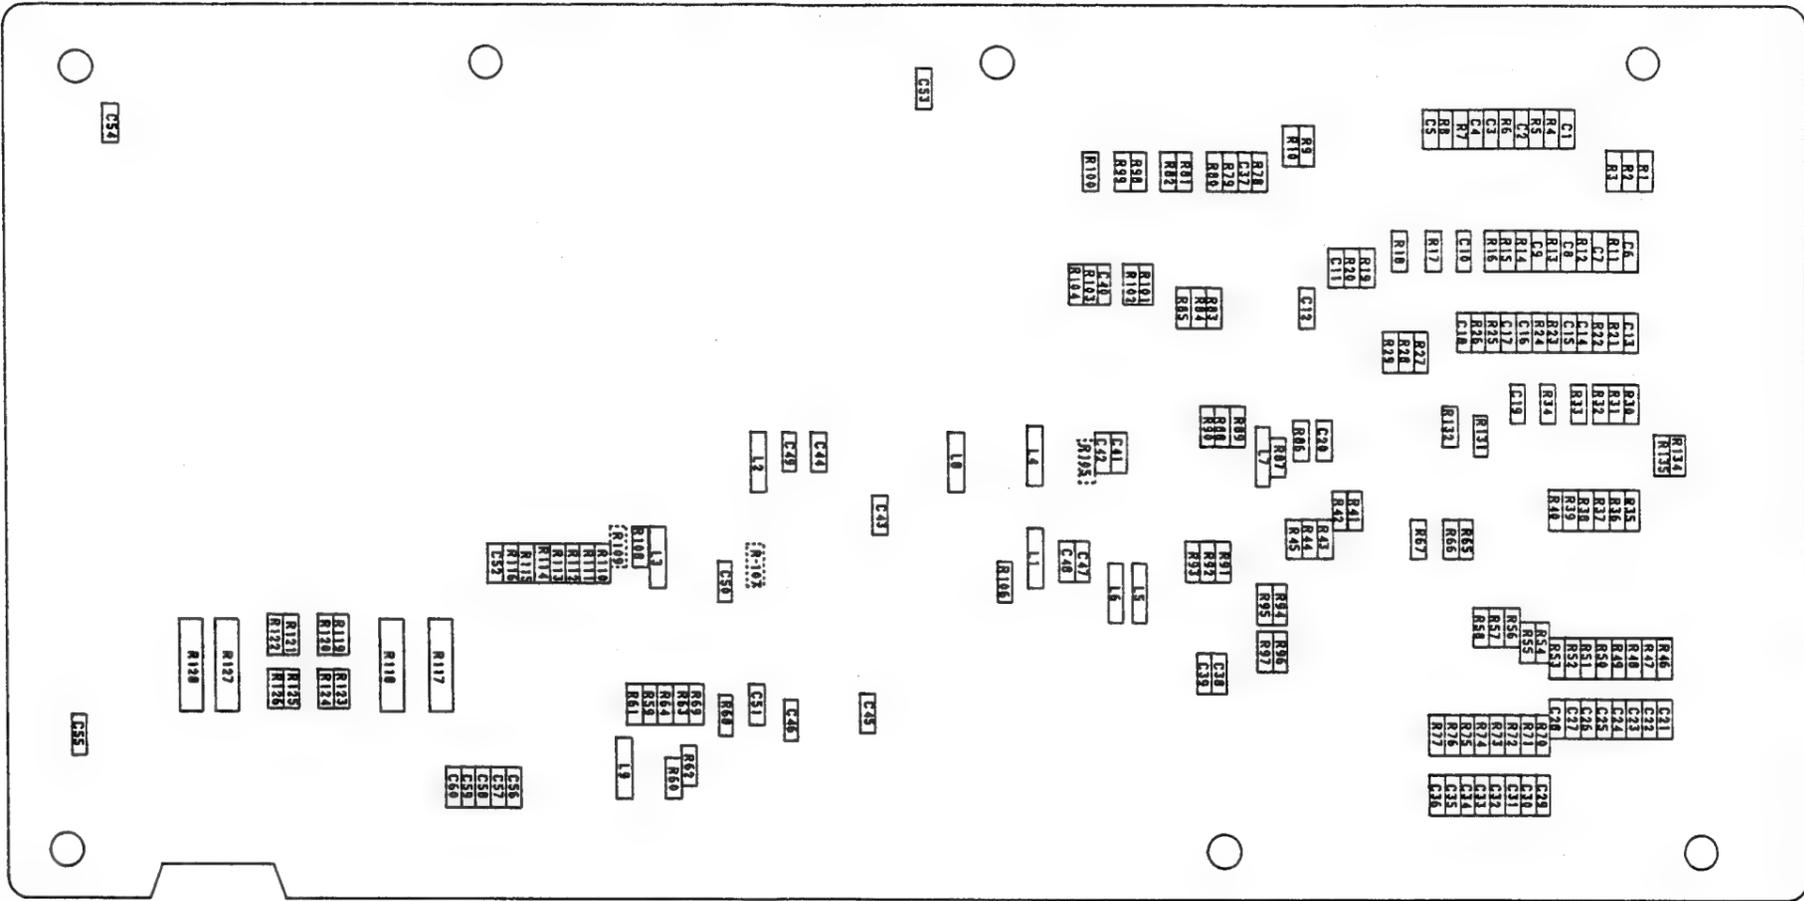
G8ESPB PCB Assembly (Component Side)
